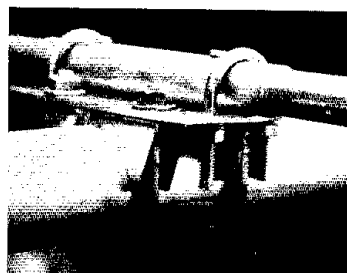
Photograph illustrating the element-to-boom clamp. Heavy-gauge scrap aluminum, U-bolts and plated muffler clamps were used to make up the assembly.
